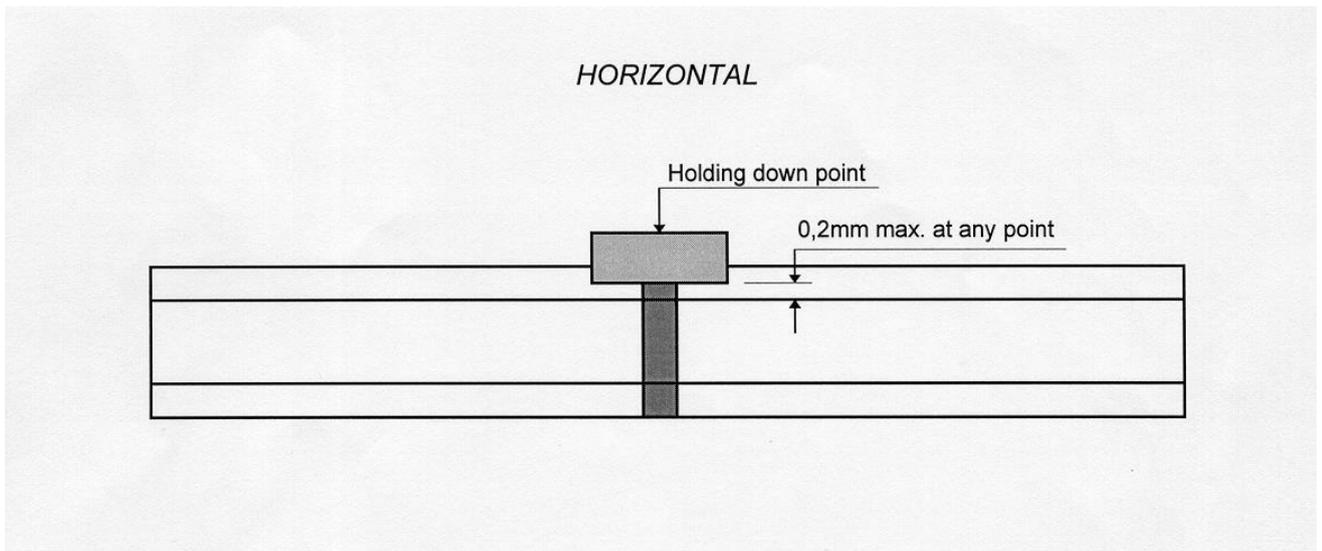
Straightness of flash butt joints after press and grinding using a 100 mm straight edge
